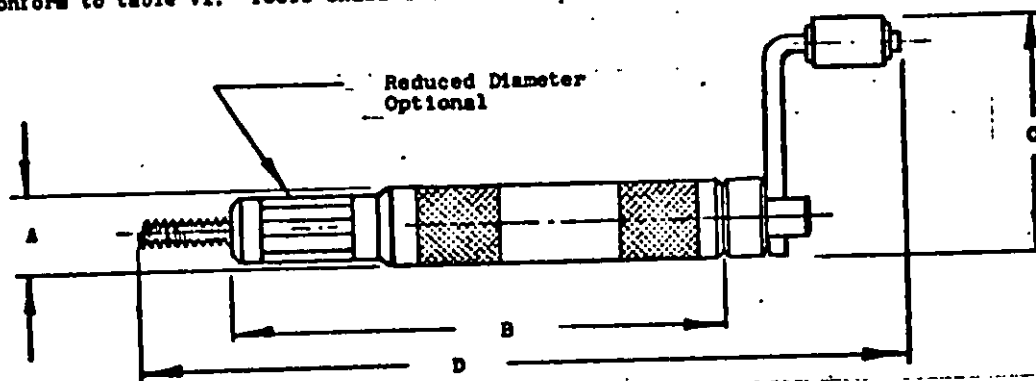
Type III, class 1, style A, Previnder Inserting Tool with threaded mandrel for 1/2 (.500) and smaller Unified Coarse, Unified Fine and Spark Plug sizes.
